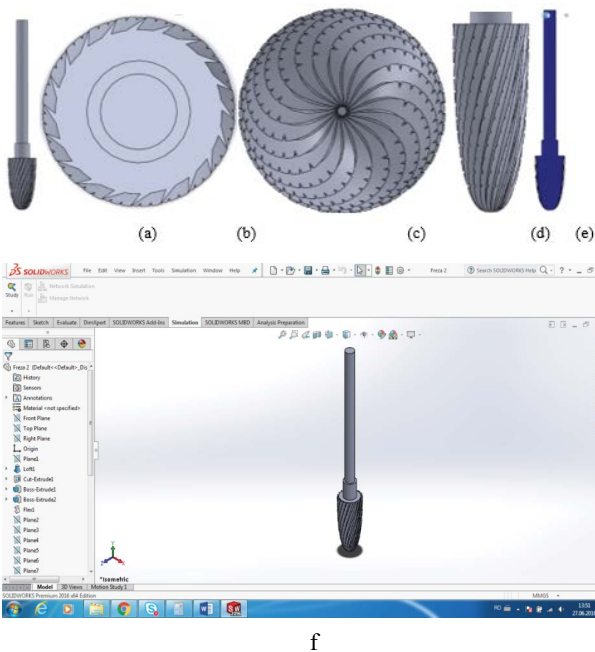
Positions of the dental bur: (a) front view; (b) top view; (c) bottom view; (d) detail on the milling area; (e) longitudinal section; (f) isometric view of the dental bur, as well as the interface of the software used.
